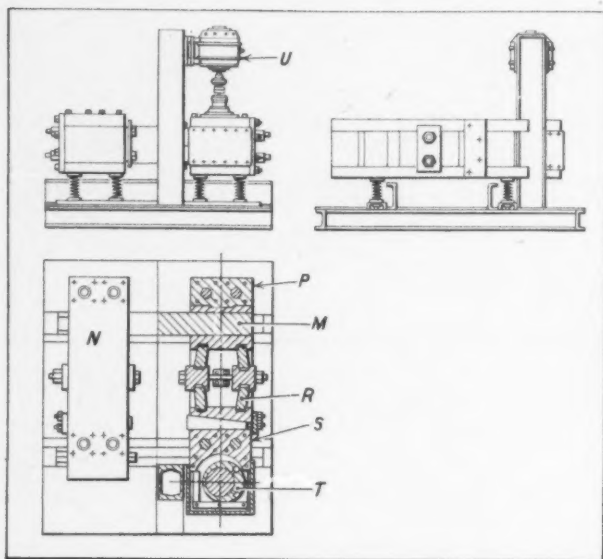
General Arrangement of the TsNIITMASH Type YP 200 Fatigue Testing Machine, for Specimens with Cross-sections up to 11 11/16 in. by 7 7/8 in. The Specimen is Subjected to Continuous Reverse Bending in the Horizontal Plane
